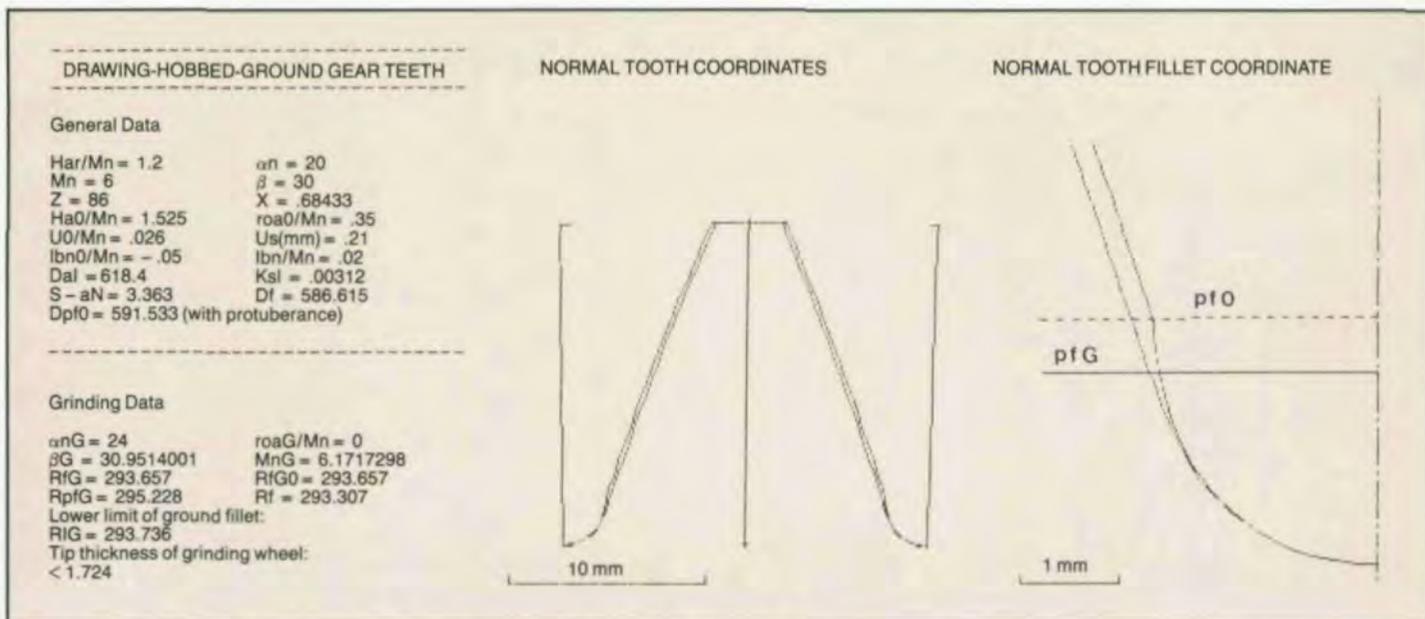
Tooth involute and fillet grinding by  $24^\circ$  pressure angle of a gear hobbed with protuberance.
